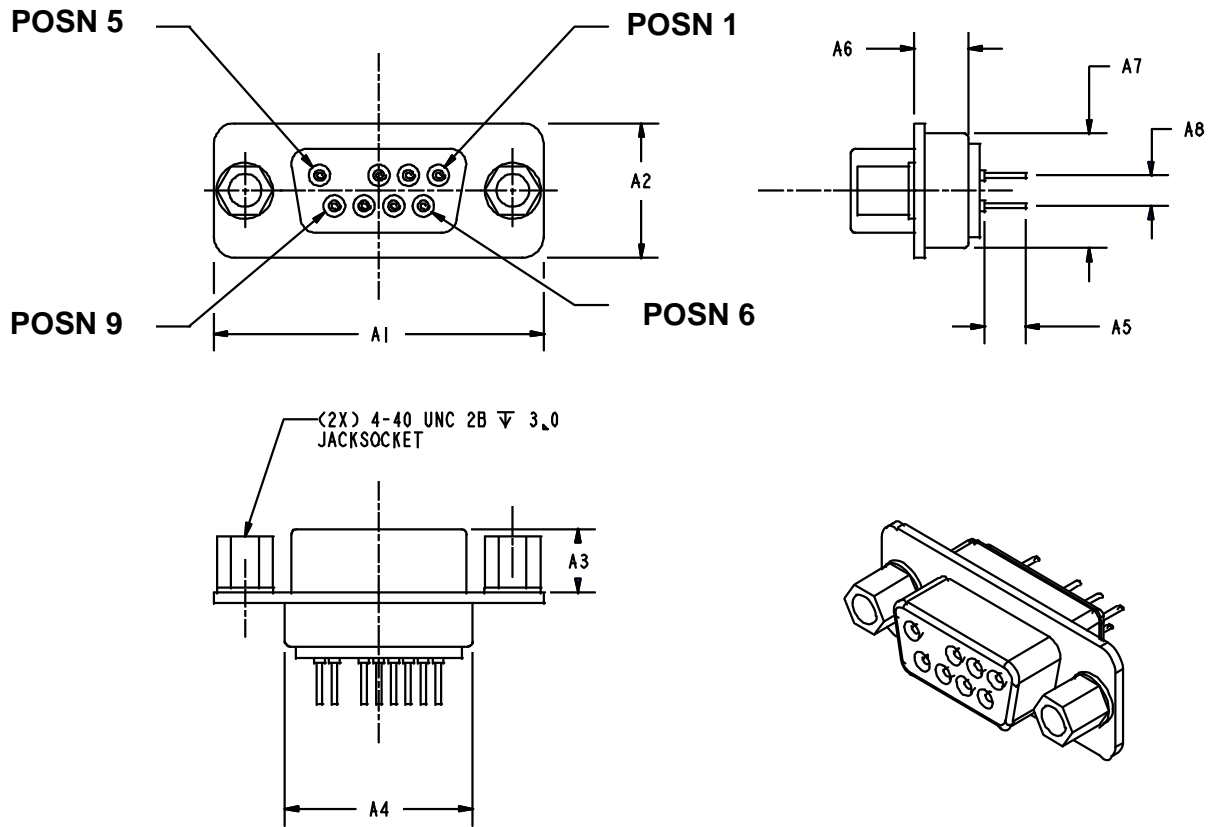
Fixed board straight through hole (version 2) overview and outline dimensions
